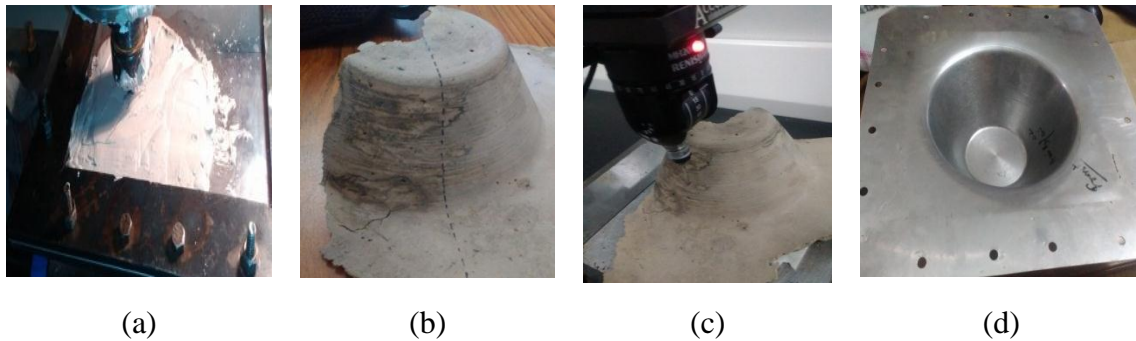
(a) Casting of cone on POP, (b) casted shape of cone, (c) CMM measuring of casted shape and (d) cone in unclamped position
